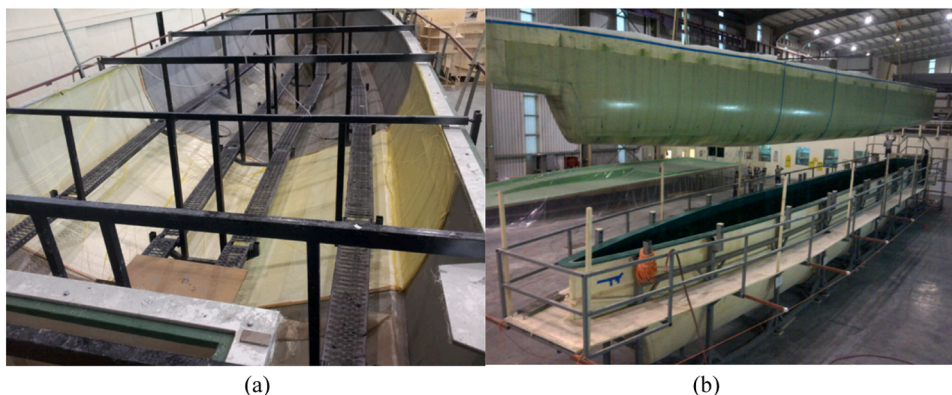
Composite hull on ship: (a) Molding a composite hull, and (b) Demolding a composite hull [44].
